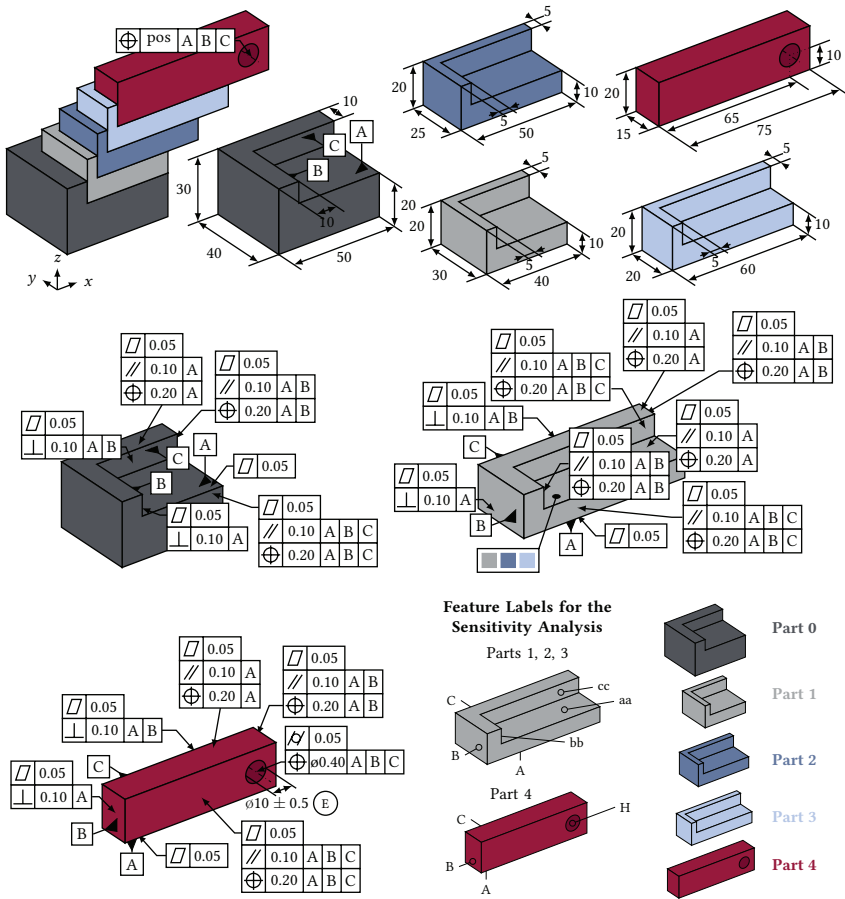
Five-Piece Assembly and Tolerancing Schemes
